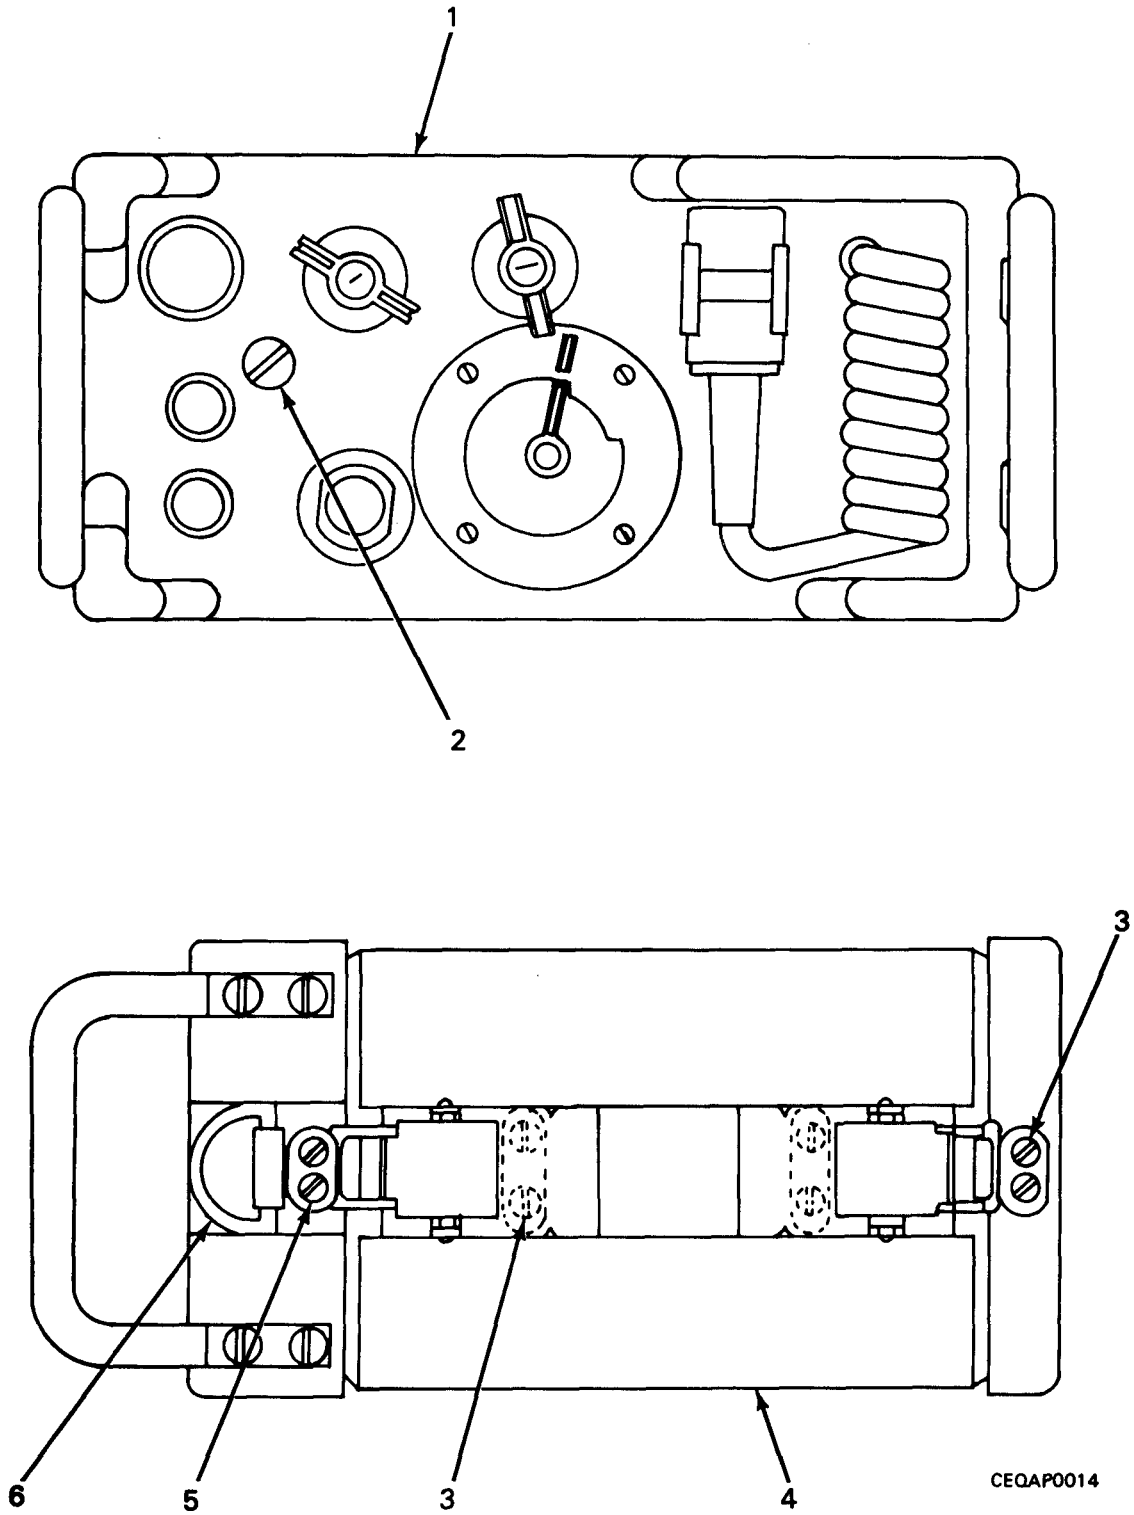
Radio Control Set C-2329/GRA-39 (Sheet 1 of 2)
